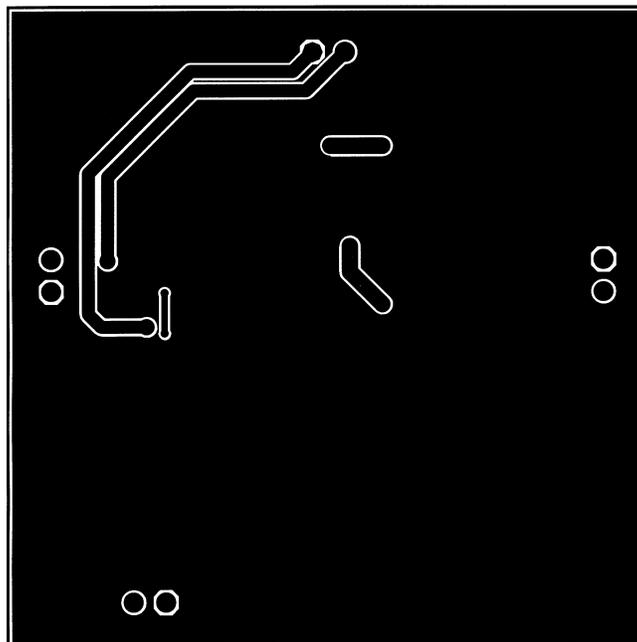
Recommended NHH0014A PCB Layout Bottom Layer
